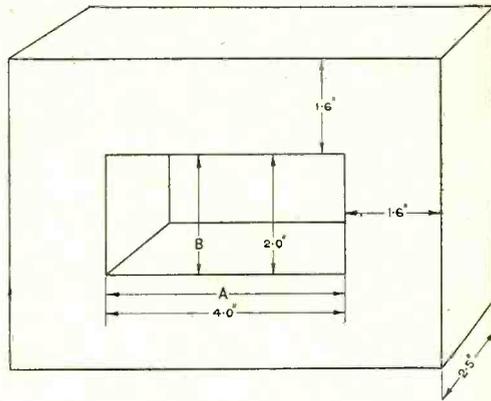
Dimensions of the core which is built up of 10 to 14 mil. laminations of transformer steel.
